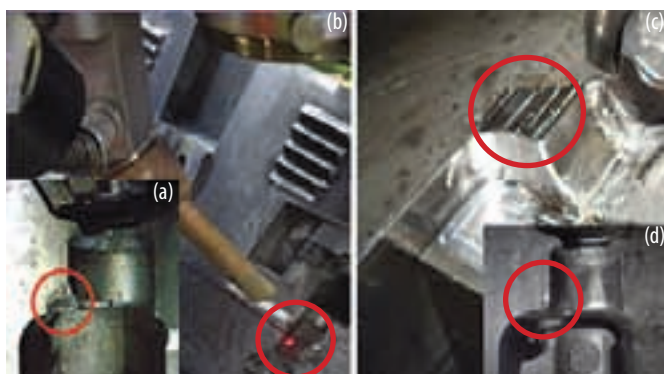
Photographs of (a) chipped-off die supplied by the industry (b) deposition by laser cladding (c) post machining and (d) Repaired die component after 30,000 shots
